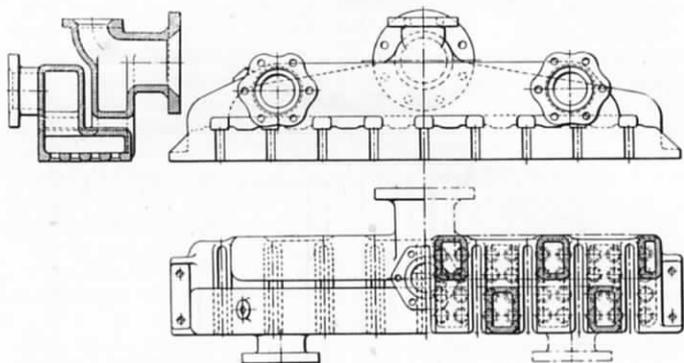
TYPE "A.X." SUPERHEATER HEADER.
